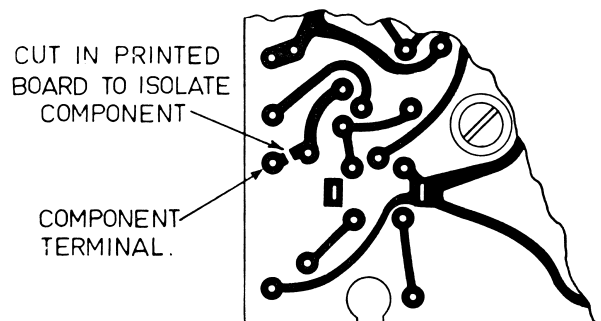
COMPONENT ISOLATION ON PRINTED CIRCUIT BOARD.
